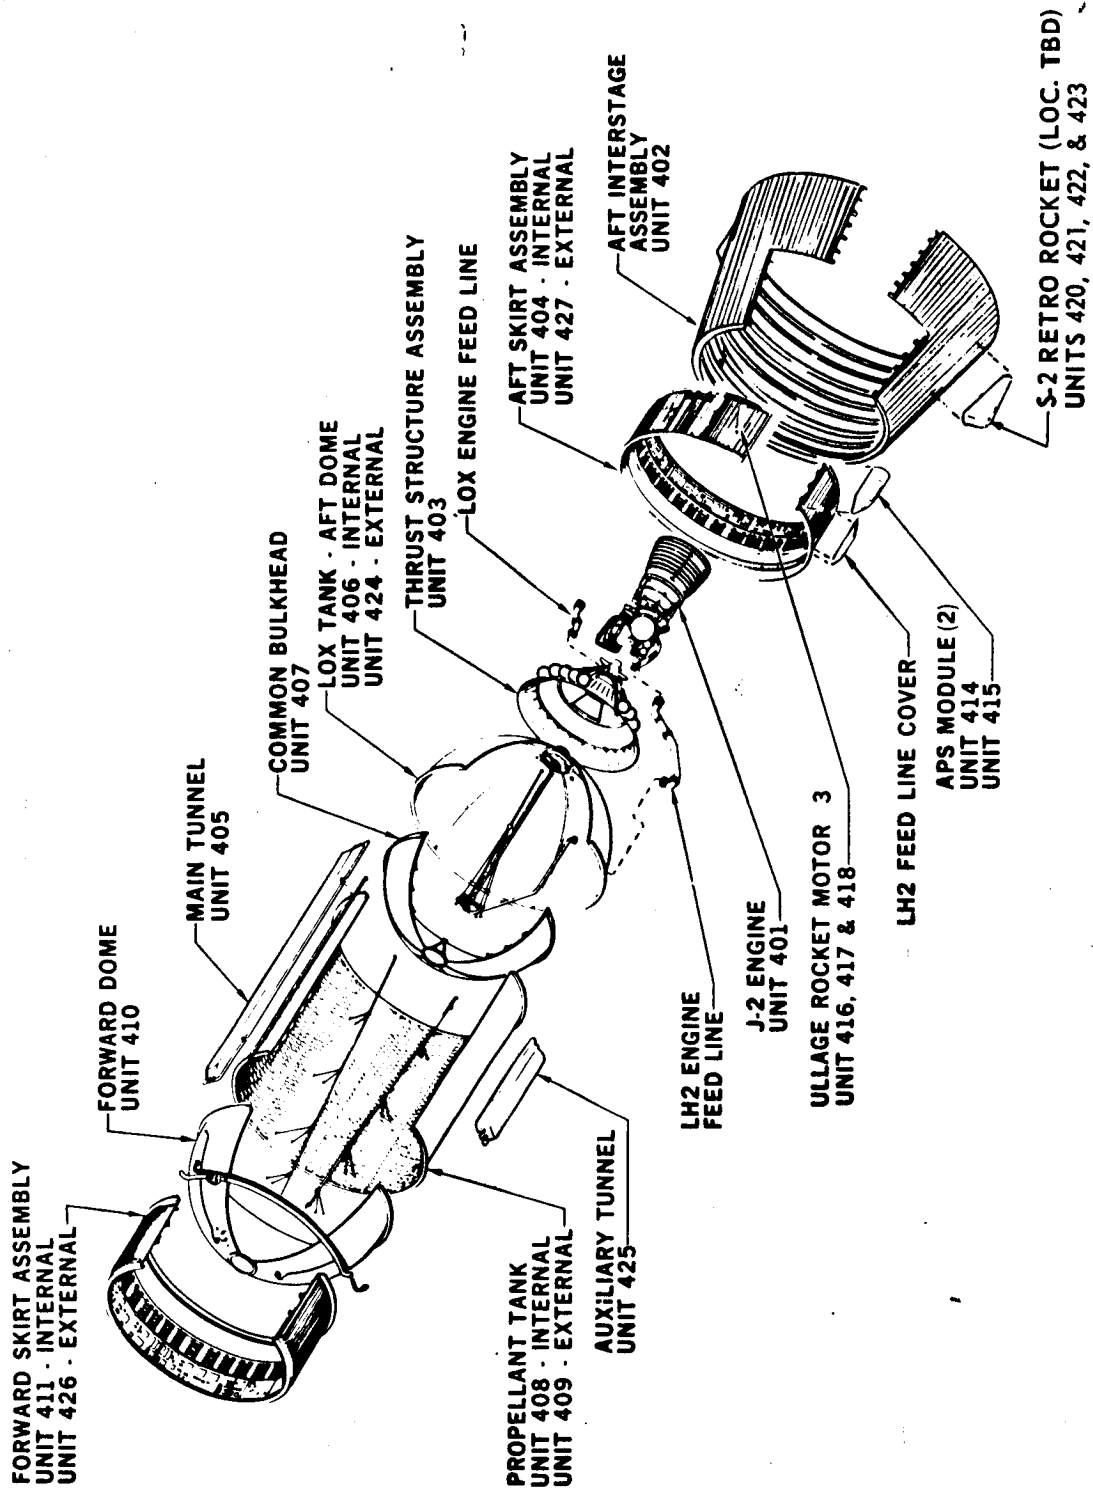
Exploded View of Stage, Showing Major Assemblies and Area Codes
